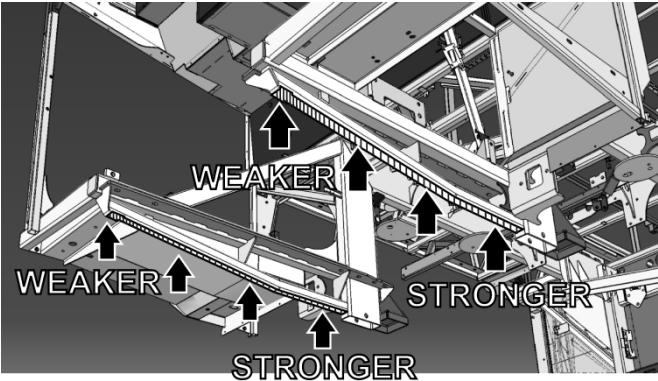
UNAPPROVED LIFTING POINTS FOR REAR END TOWING – SIDE MEMBERS LOCATED UNDER THE ENGINE CRADLE SUPPORT RAILS
